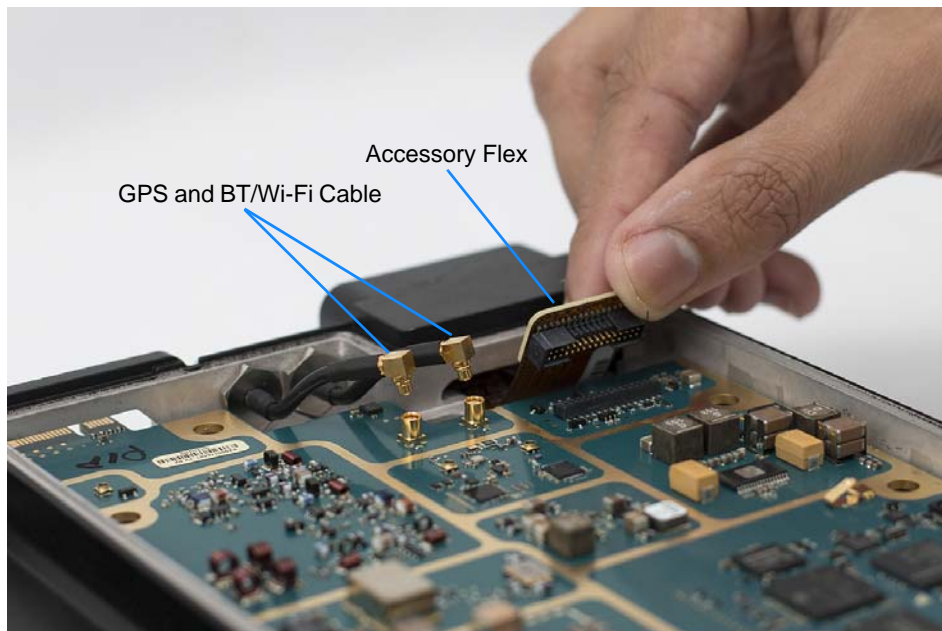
Removing the GPS Cable, BT/Wi-Fi Cable, and Accessory Flex
